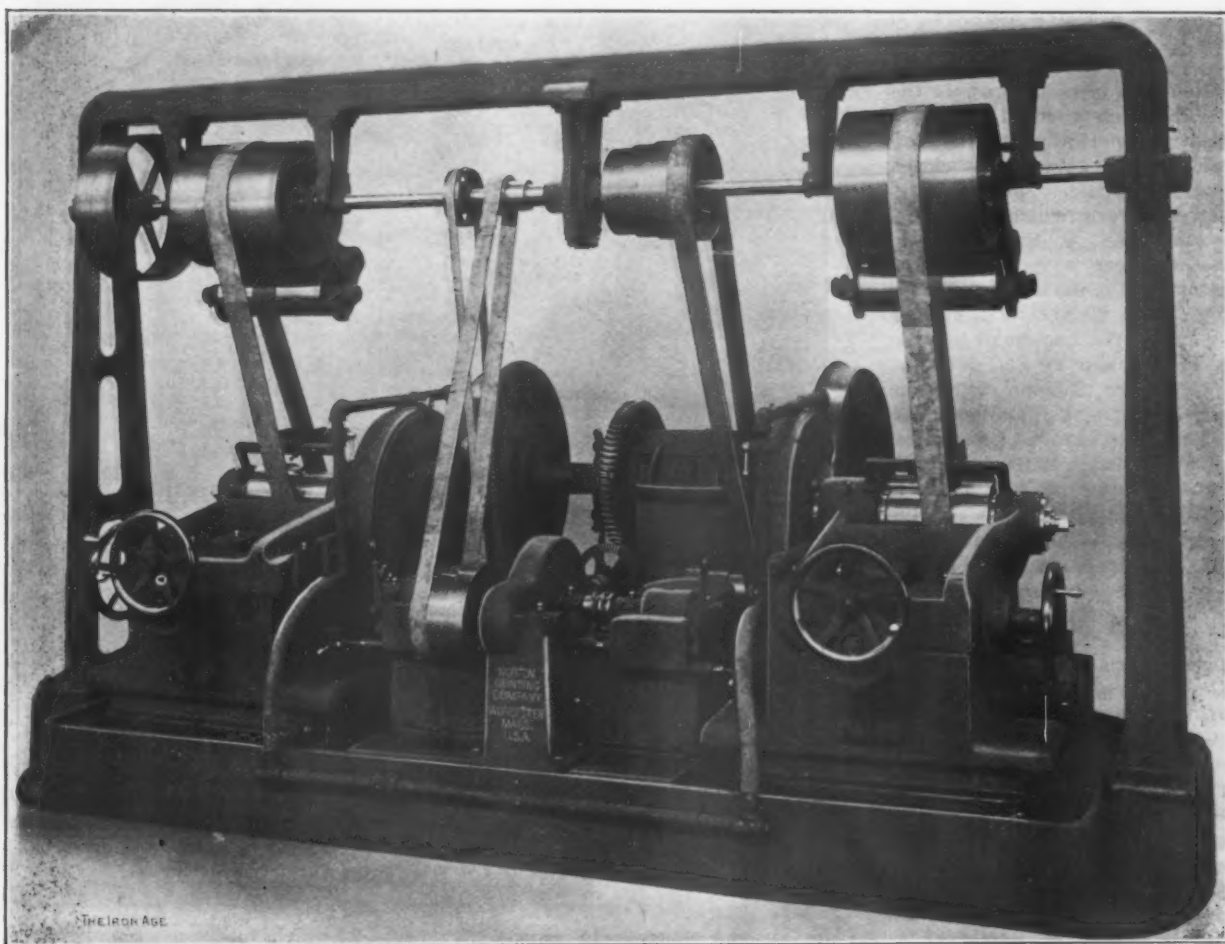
Front View of the New Car Wheel Grinder Built by the Norton Grinding Company, Worcester, Mass.
